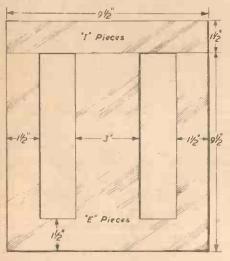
Dimensions of stalloy core stampings for the transformer and choke.
